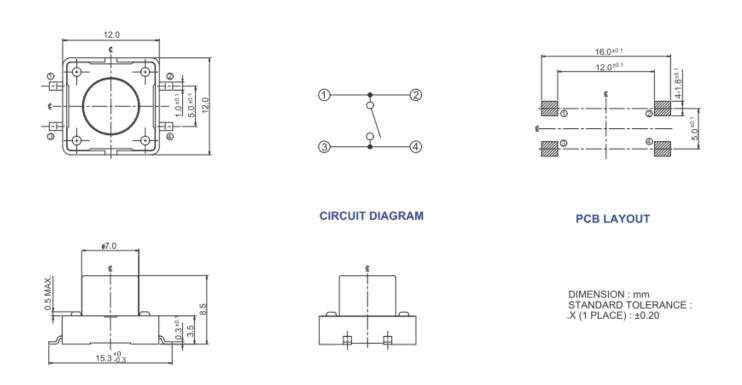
224AMVC... Surface Mount Gull Wing, Actuator Height 4.3mm
